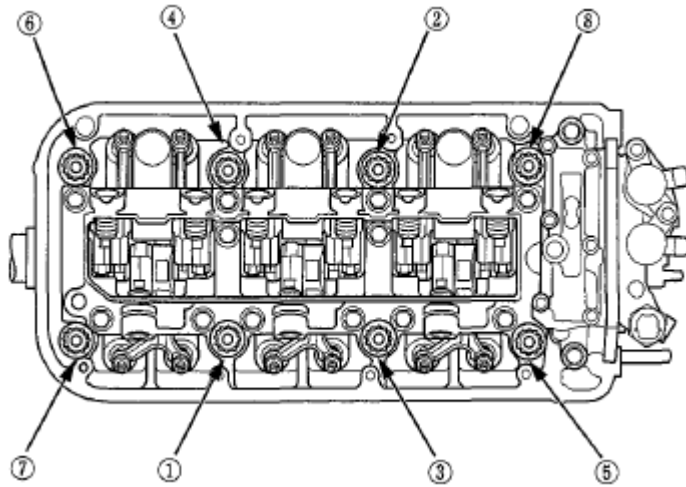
Identifying Rear Cylinder Head Bolt Tightening Sequence
